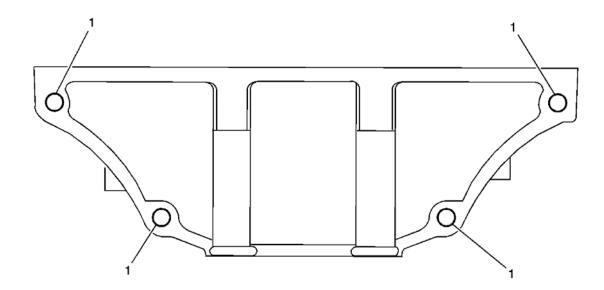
Oil Pan Thread Repair - Rear View Courtesy of GENERAL MOTORS CORP.
